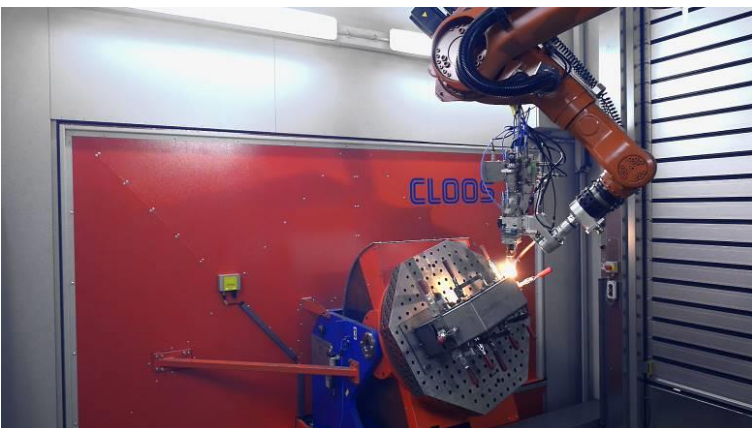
The main advantages of Laser Hybrid Weld are a high welding speed and an optimum weld quality.
